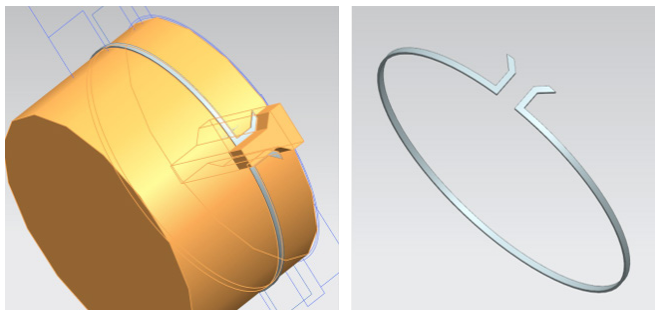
Construction of the flux loops and shell heater using design cutting tools (left) and the finished product (right).
